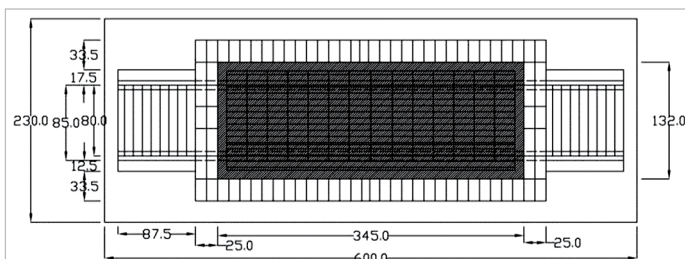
Final stage of the oven walls construction and chain conveyor installation
